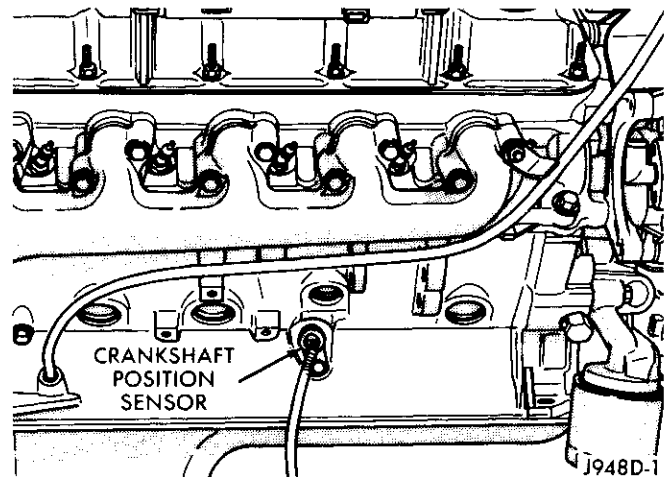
Crankshaft Position Sensor—8.0L V-10 Engine
